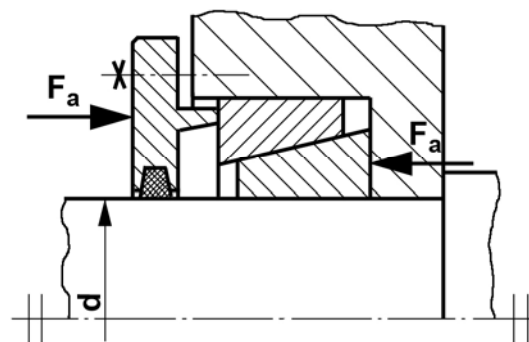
Tapered yielding squeeze ring assembly with axial hub shoulder
